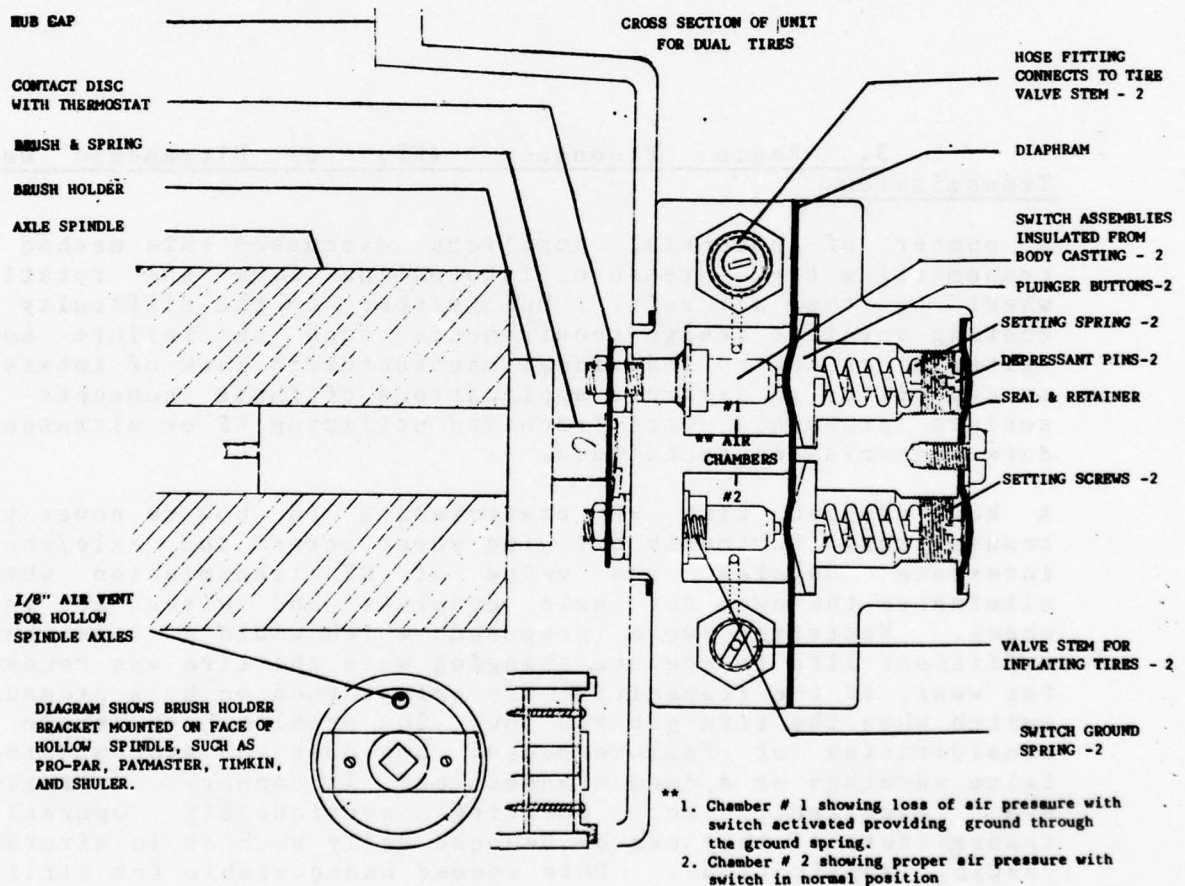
HUB-MOUNTED SWITCH INSTALLATION (CONCEPT K)
